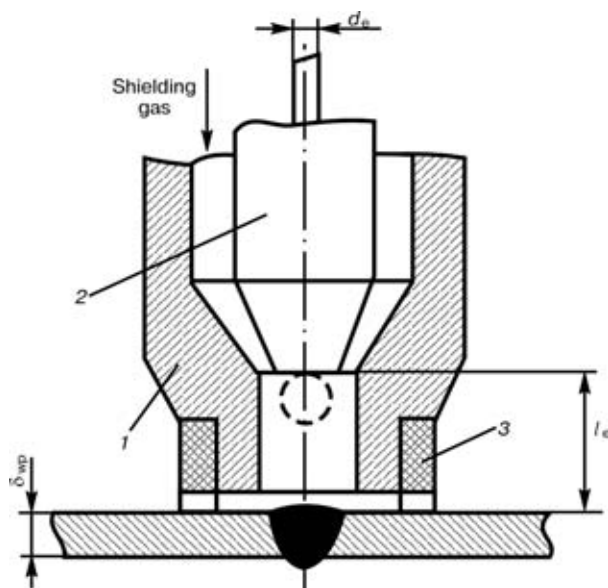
Schematic diagram of arc spot welding: 1 – outer nozzle; 2 – heat-dissipating internal nozzle; 3 – supporting bushing
